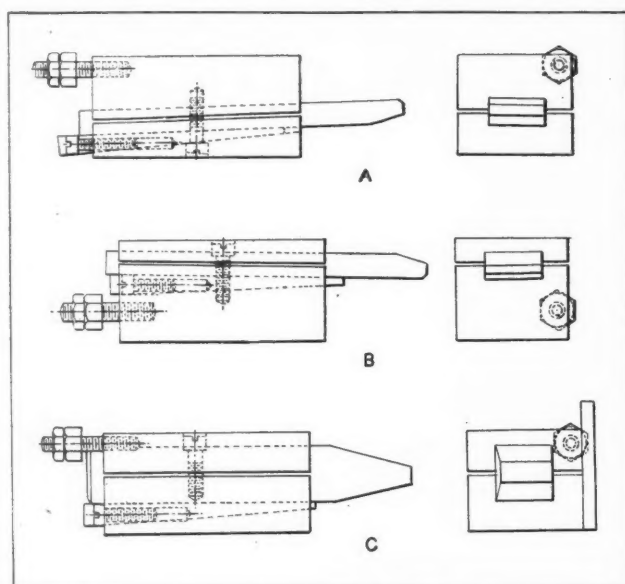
Upper, Lower and Center Tool-holders employed on Gear Planer
